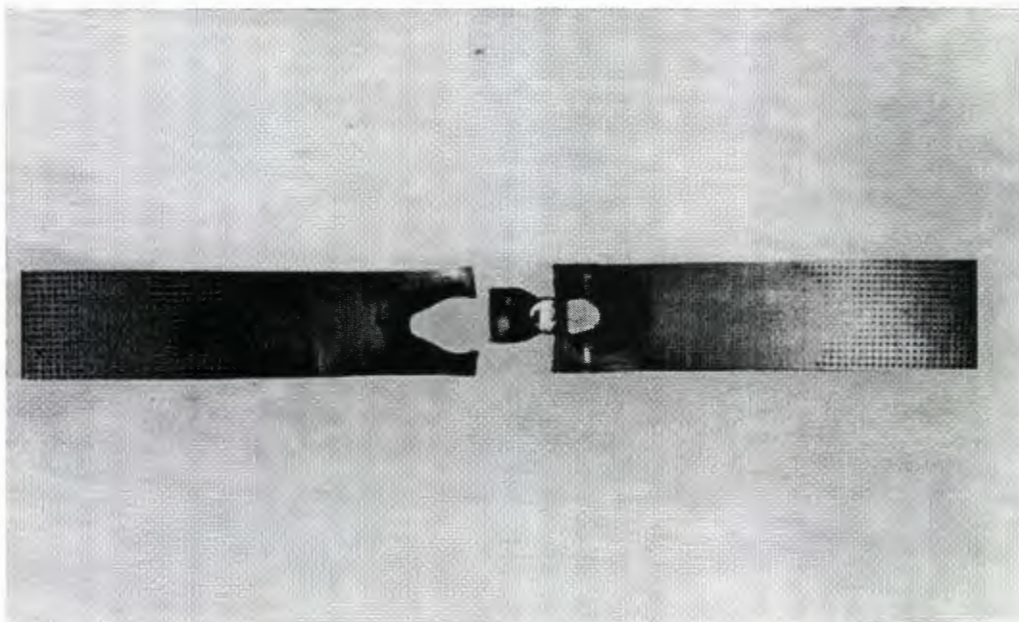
Plug weld failure in which a nugget tore steel around the weld region; reduced 50%.
